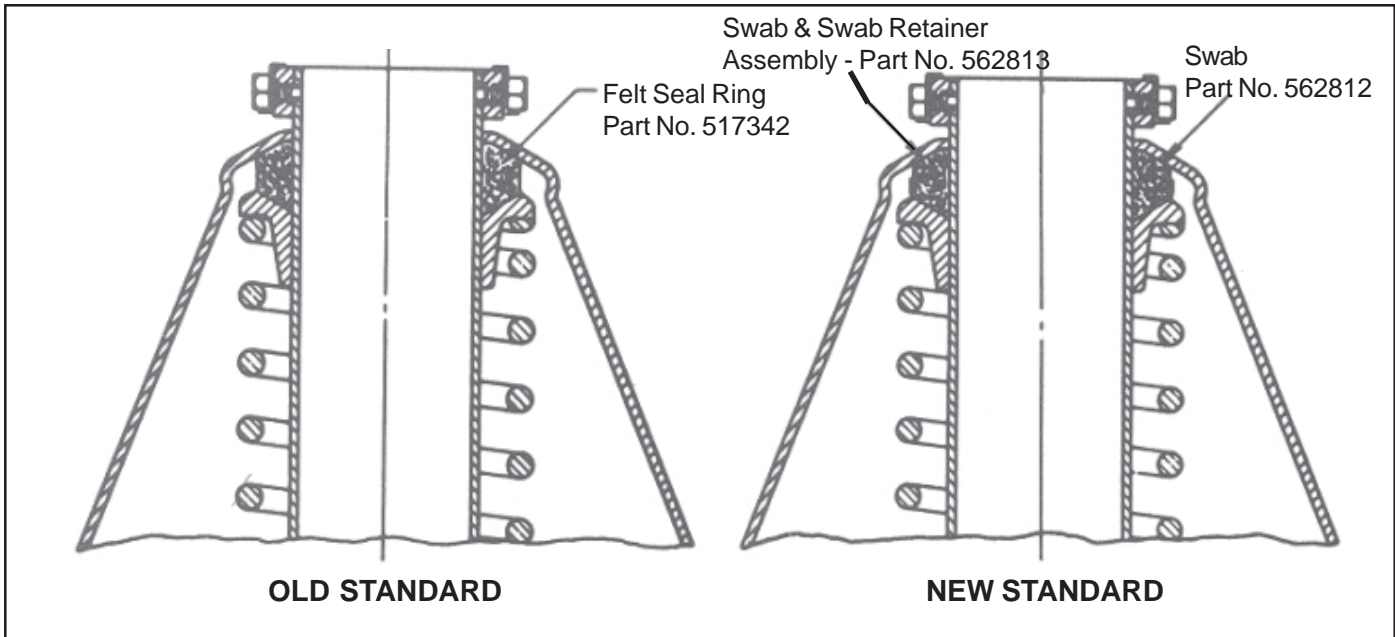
"AB" Brake Cylinder Hollow Piston Rod Packing Seal
